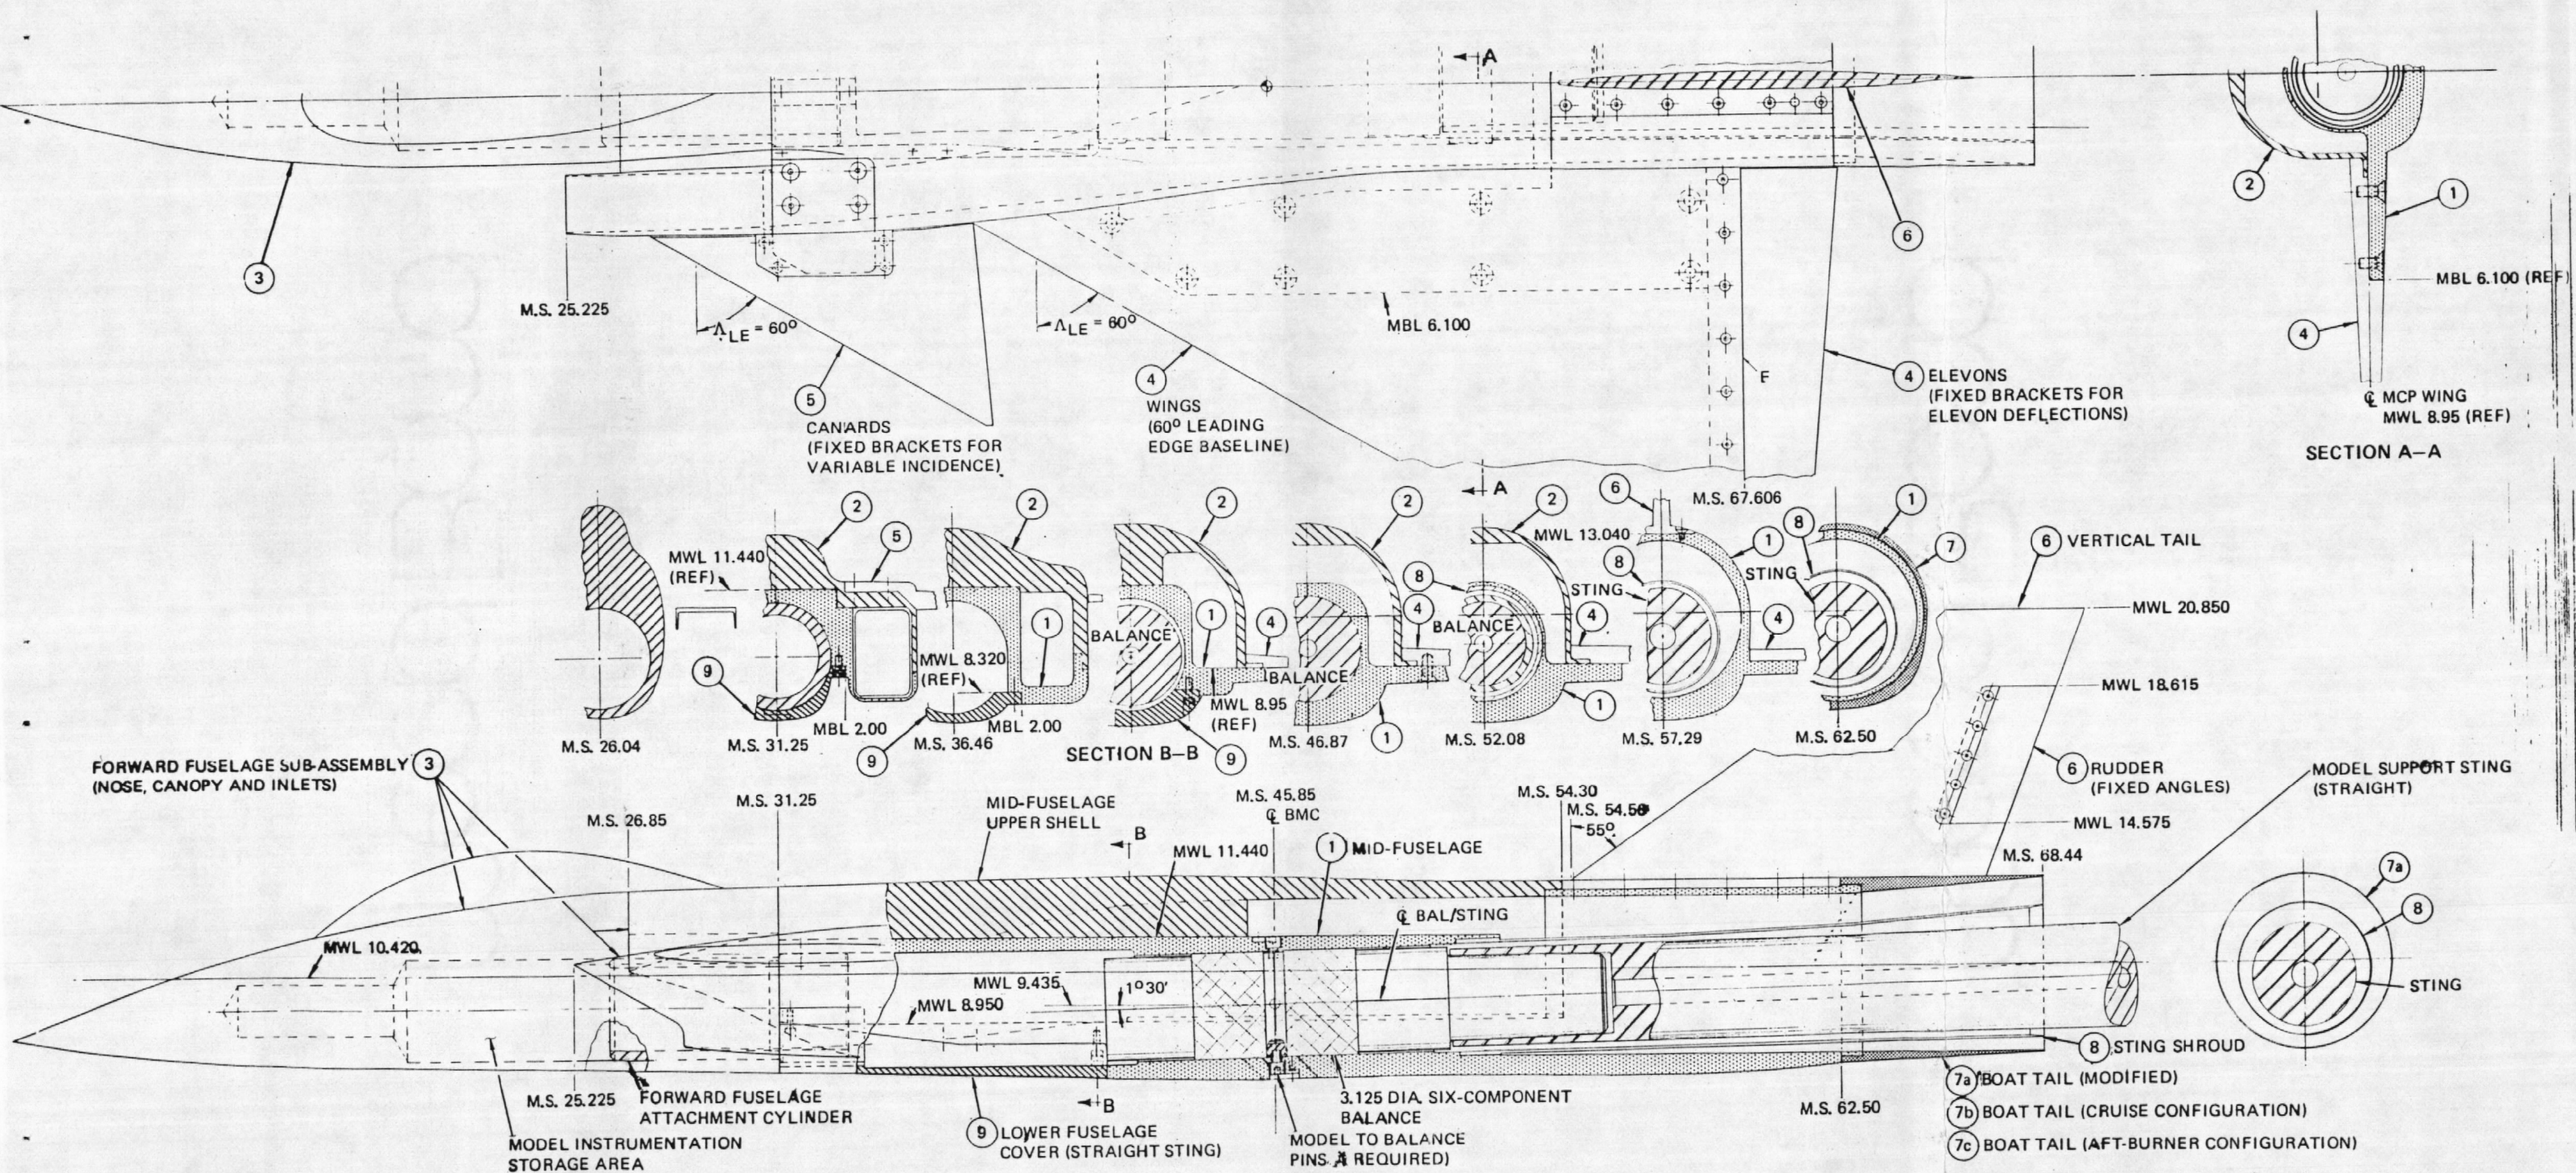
Delta Canard Model Assembly - Straight Sting Support
